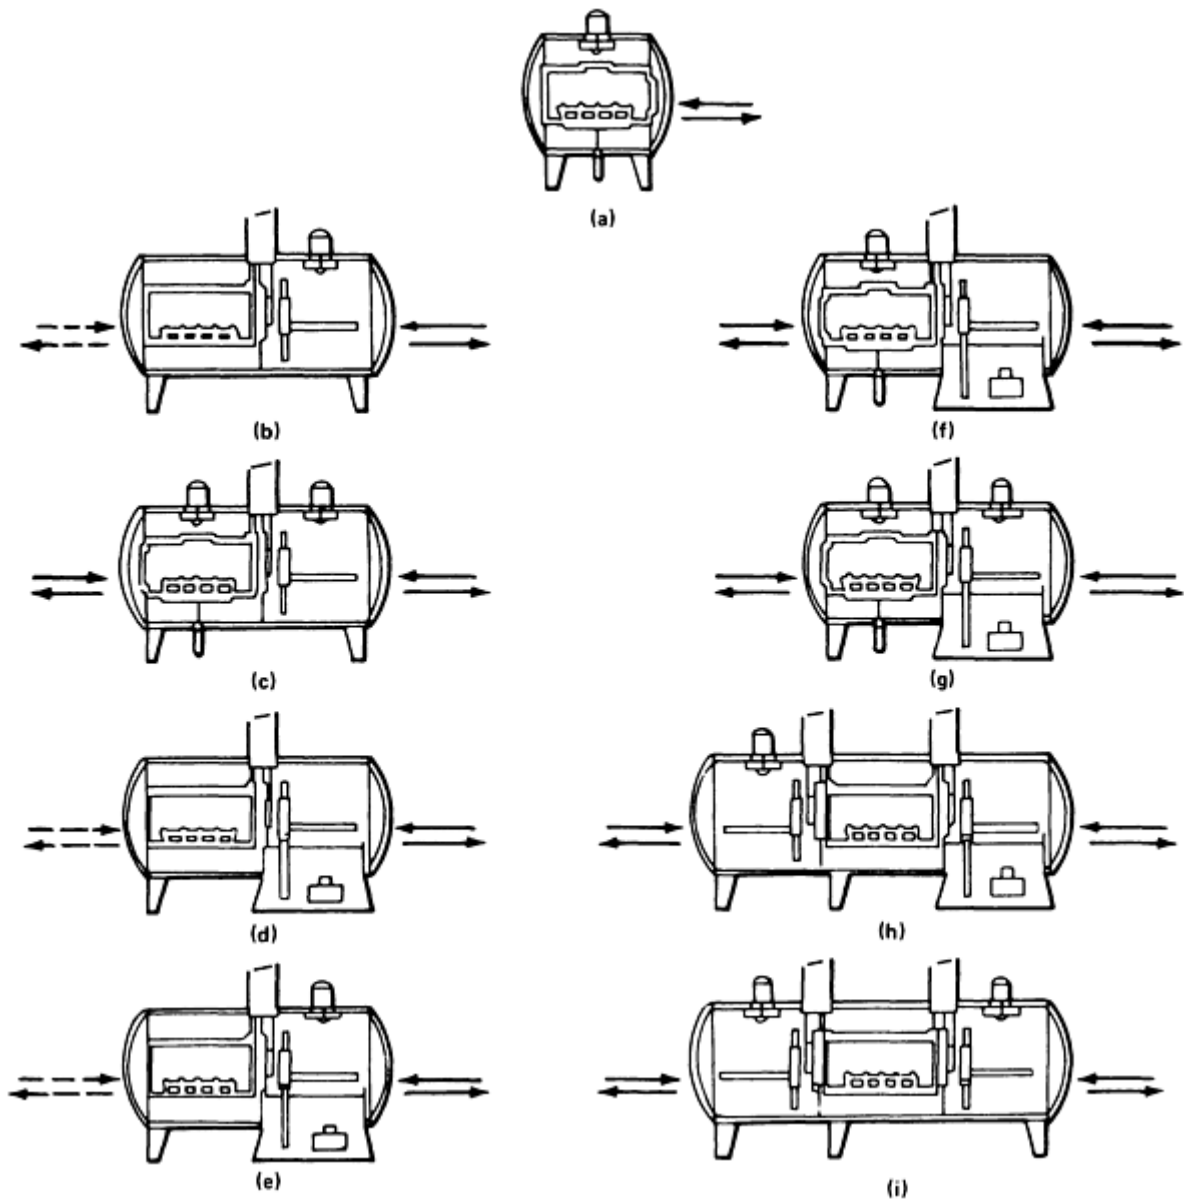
Horizontal vacuum furnace configurations. (a) Single-chamber vacuum furnace with gas/fan quenching. (b) Two-chamber vacuum furnace; one chamber for heating, with integral second chamber for gas/fan quenching only and mechanism for internal in-and-out transverse movement of work load to and from heat chamber. Unit can be loaded and unloaded only from cooling or quenching chamber. (c) Same as (b) but gas/fan cooling is also included in heat chamber and unit can be loaded or unloaded from either chamber. (d)
